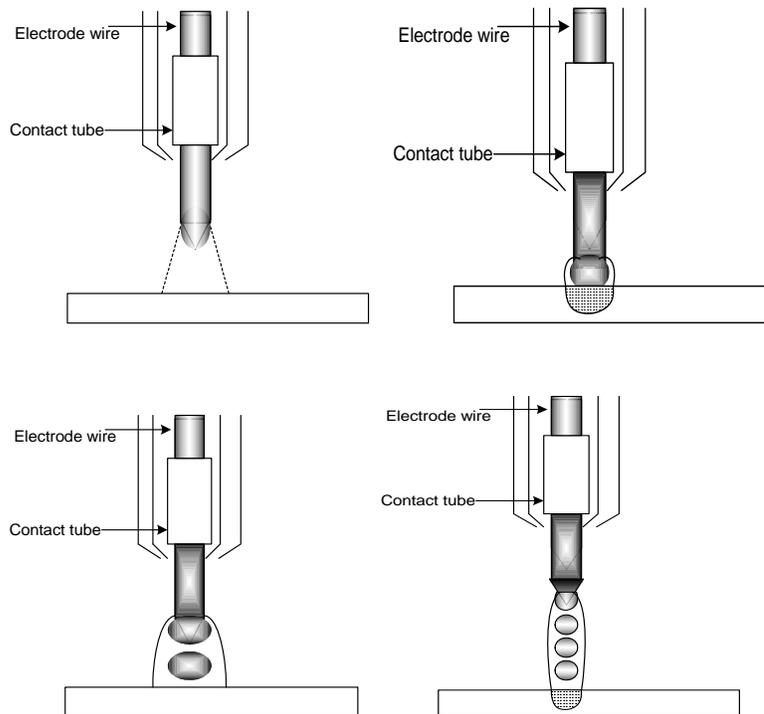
Schematic of modes of metal transfer in MIG welding a) typical set, b) short circuiting transfer, c) globular transfer, and c) spray transfer
